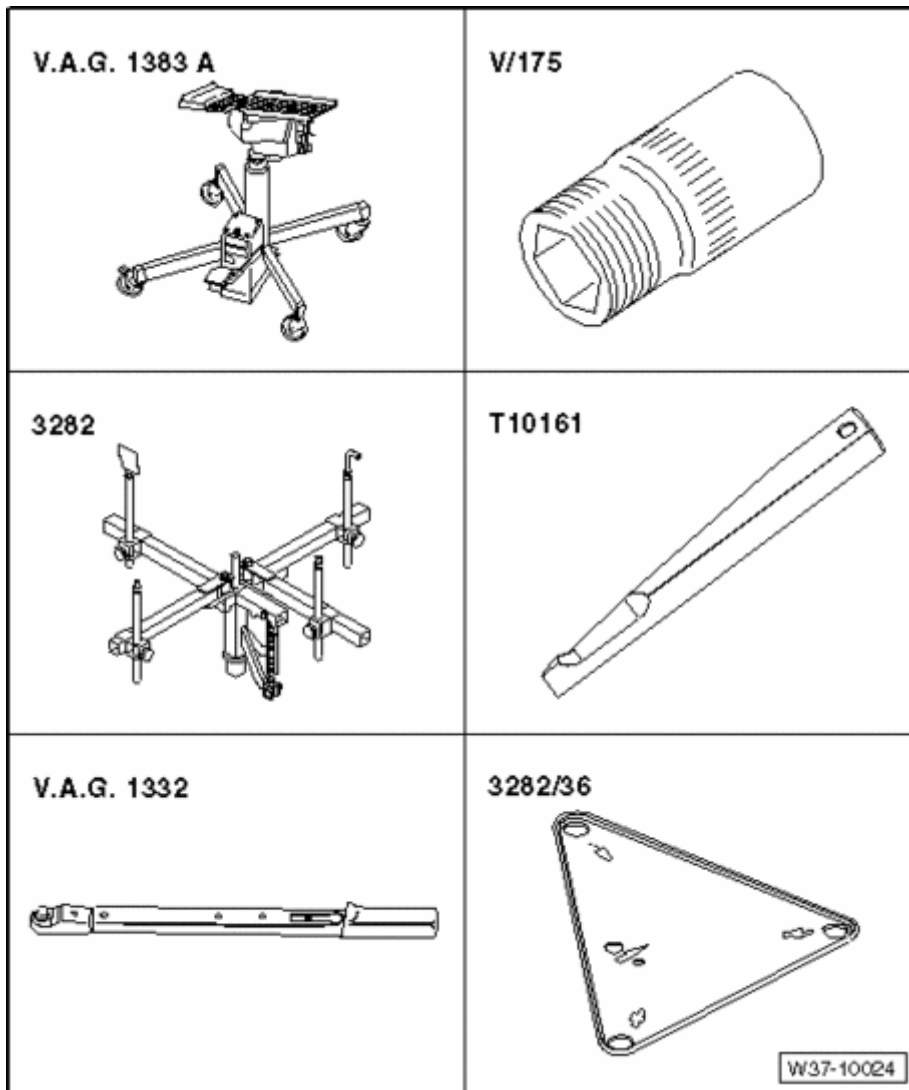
Identifying Special Tools -- Transmission, Removing (1 Of 2)
